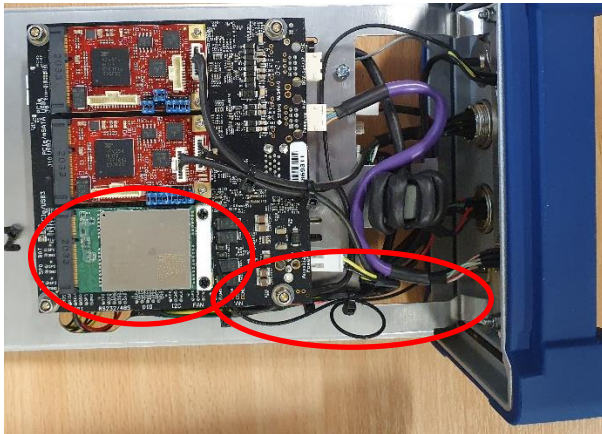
Interior of the unit showing LTE module c/w coaxial cable to bulkhead
